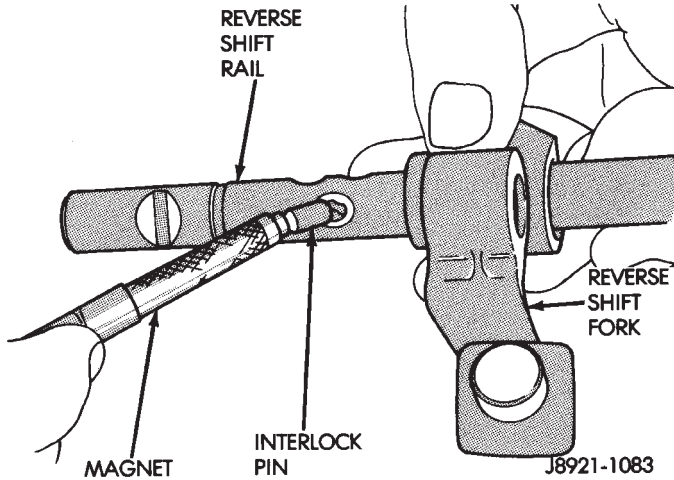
Reverse Shift Rail Interlock Pin Removal
